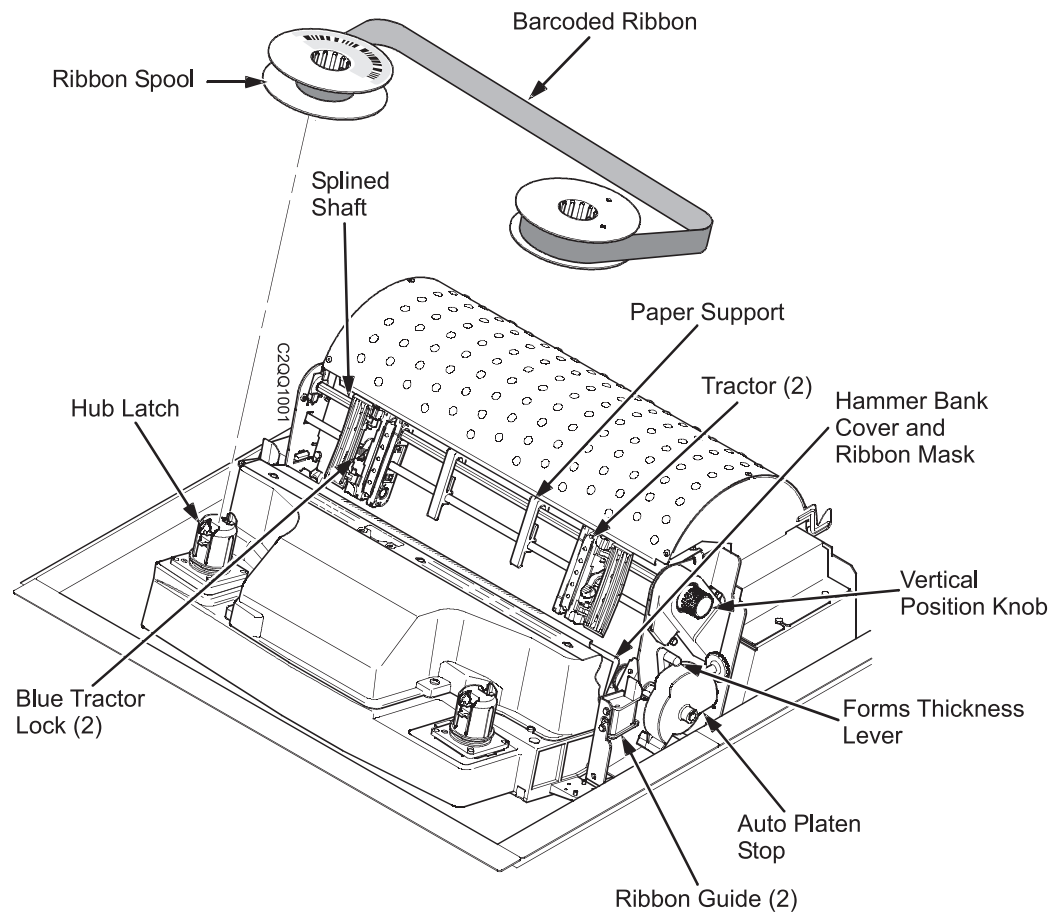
6500-v Printer Component Locations with the Ribbon Spools Exploded Above
